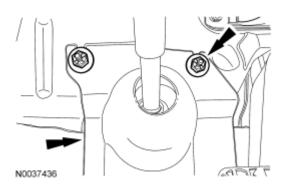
Locating Steering Intermediate Shaft Bolt Courtesy of FORD MOTOR CO.
